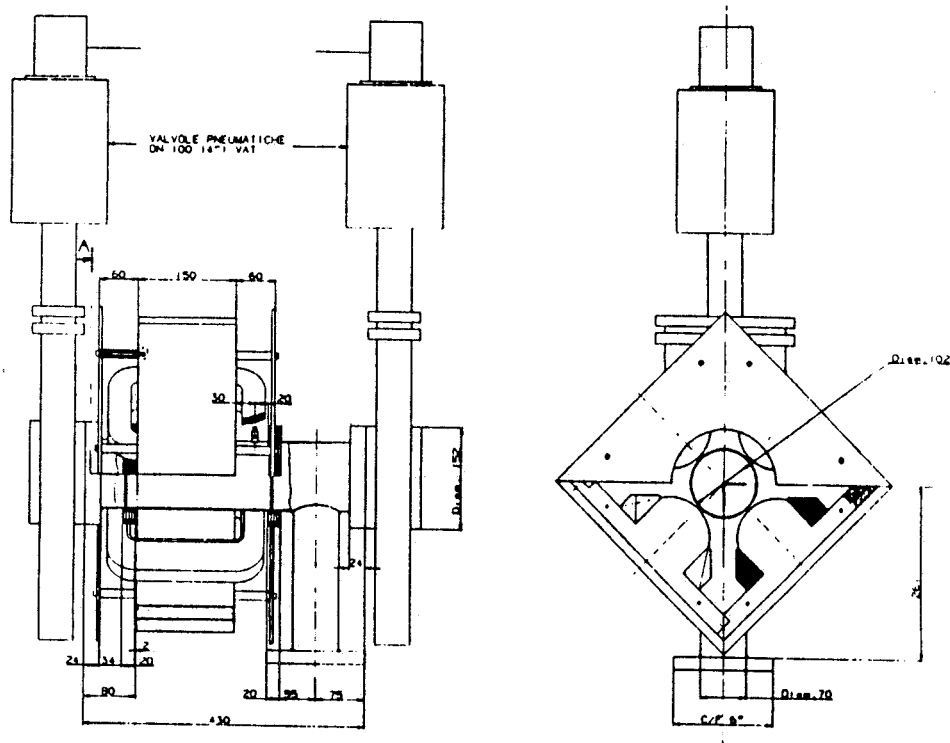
Layout of the connection assembly between two cryomodules of the sections L1 and L2.
